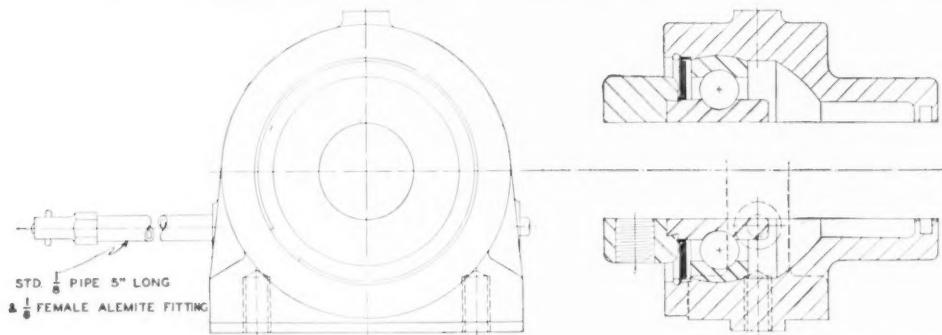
The cylinder and bearing of a spinning frame equipped with Fafnir ball bearings, and provision for pressure grease lubrication.
